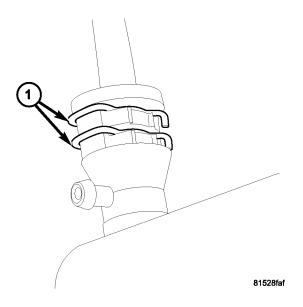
Hydraulic Tube Retaining Clips 1 - RETAINER CLIPS
